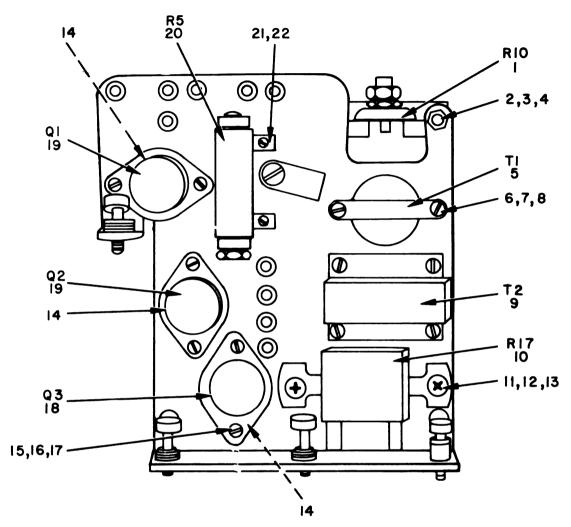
Housing Assembly (AlA3), Mounting Clamp.
